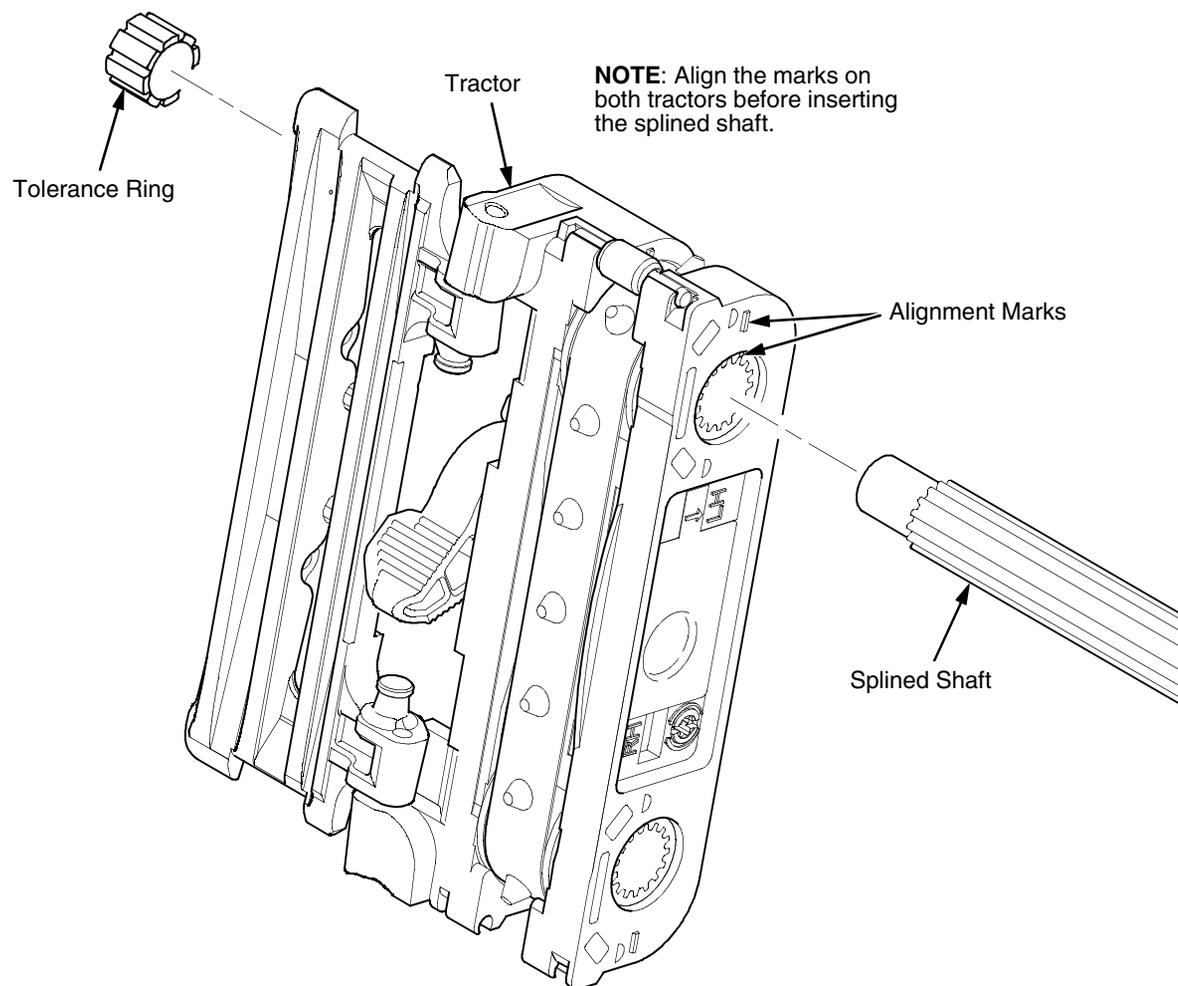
This figure shows how to install the splined shaft into the paper feed tractors.
